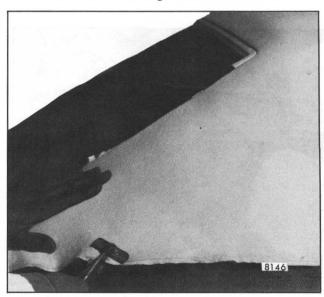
Cementing Fabric Roof Cover to Roof Panel
